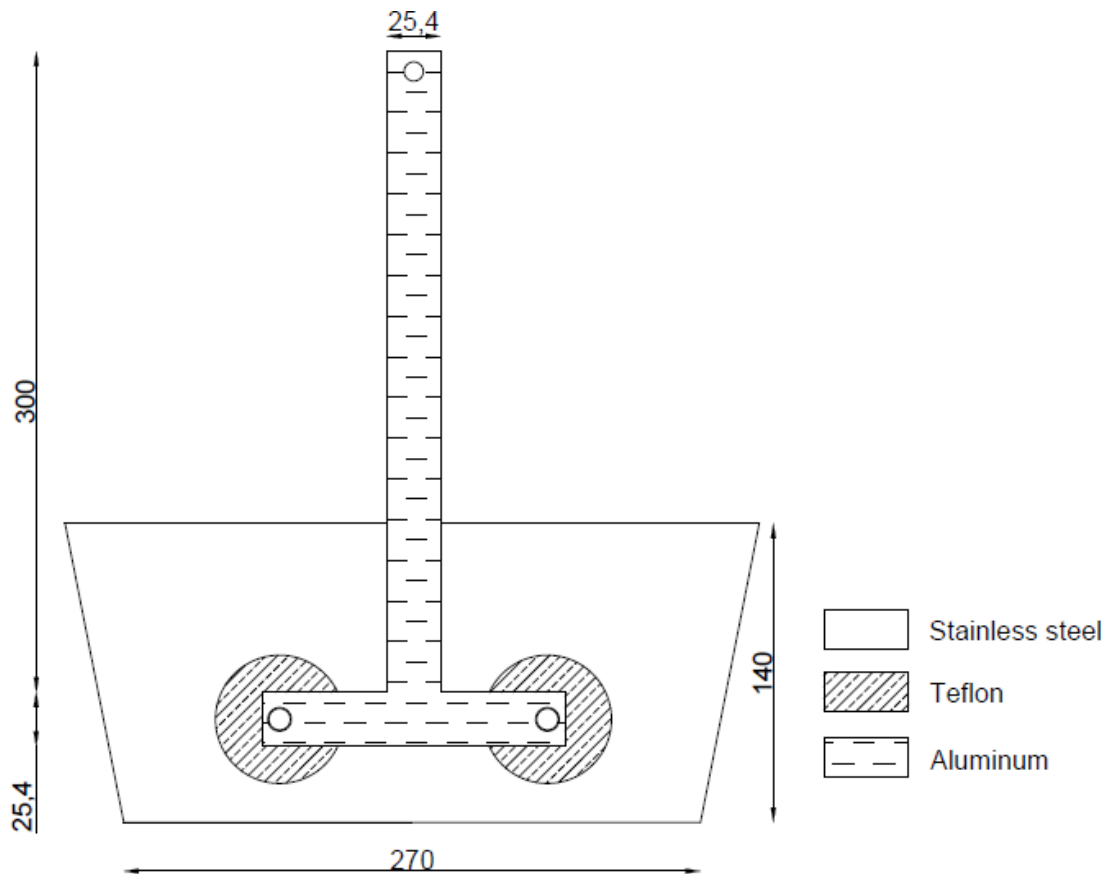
Mechanical drawing of Unit 2 – stripping unit (Cross-sectional front view; dimensions in mm)
